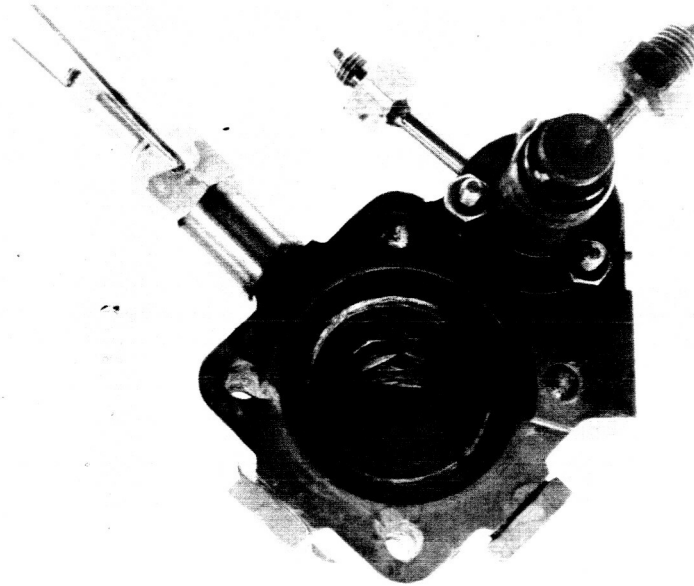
Damaged Surface of Cooled Cylinder Head Insert
